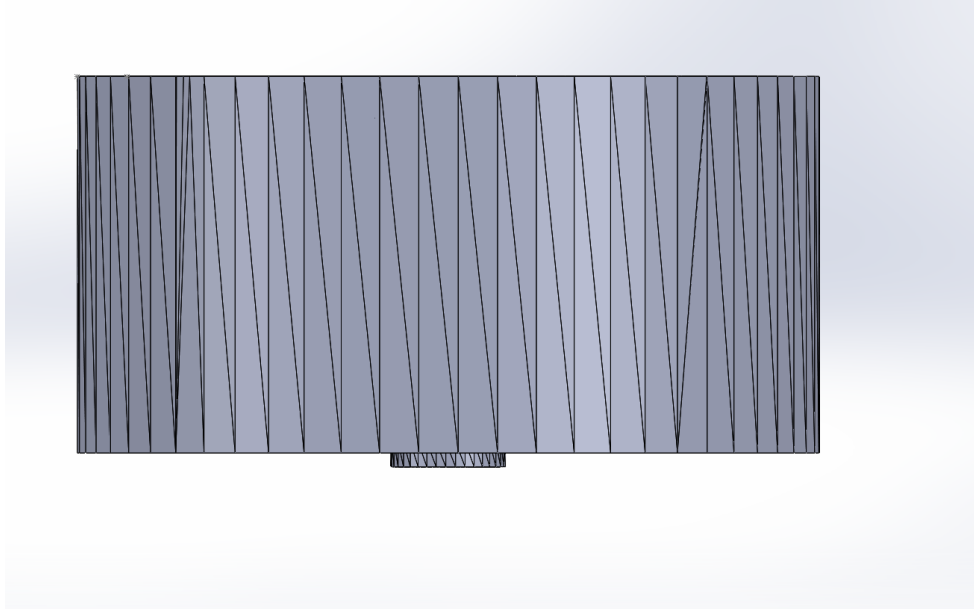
Top view of the rotor and stator alignment in the BLDC motor assembly
